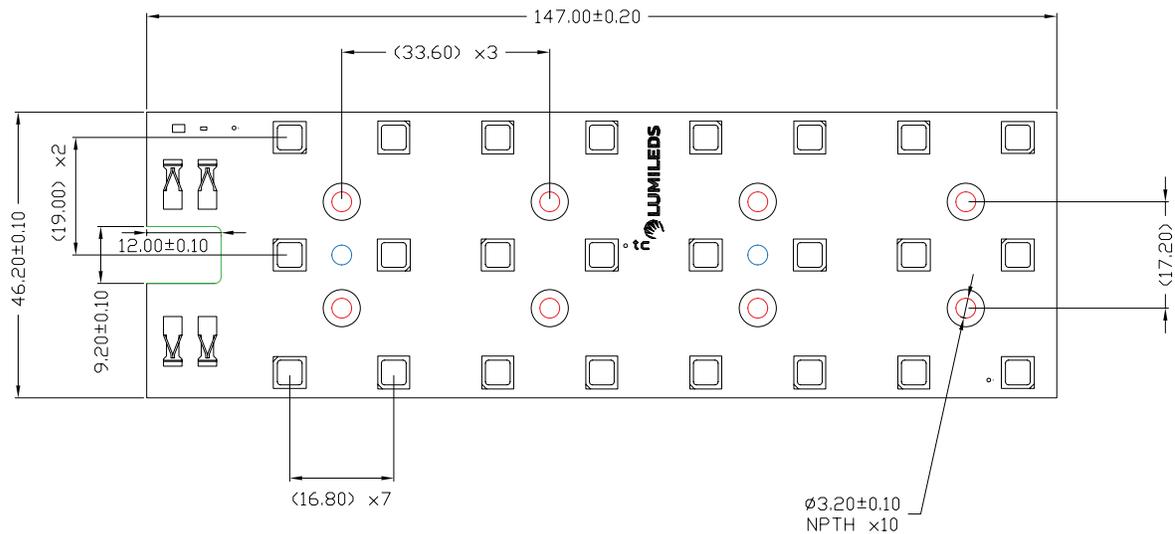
Board mounting screw holes (red circles), optional lens alignment holes (blue circles) and an opening (green) for routing input wires.
